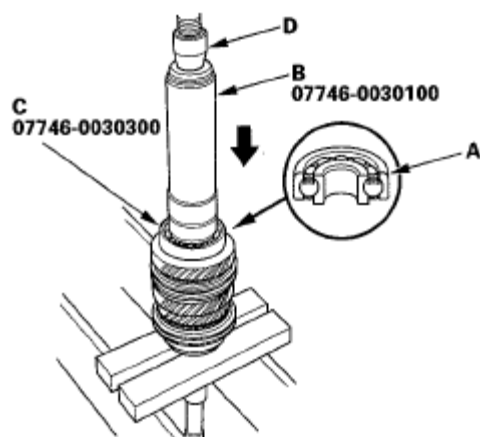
Identifying Angular Ball Bearing, I.D. Driver And I.D. Attachment
